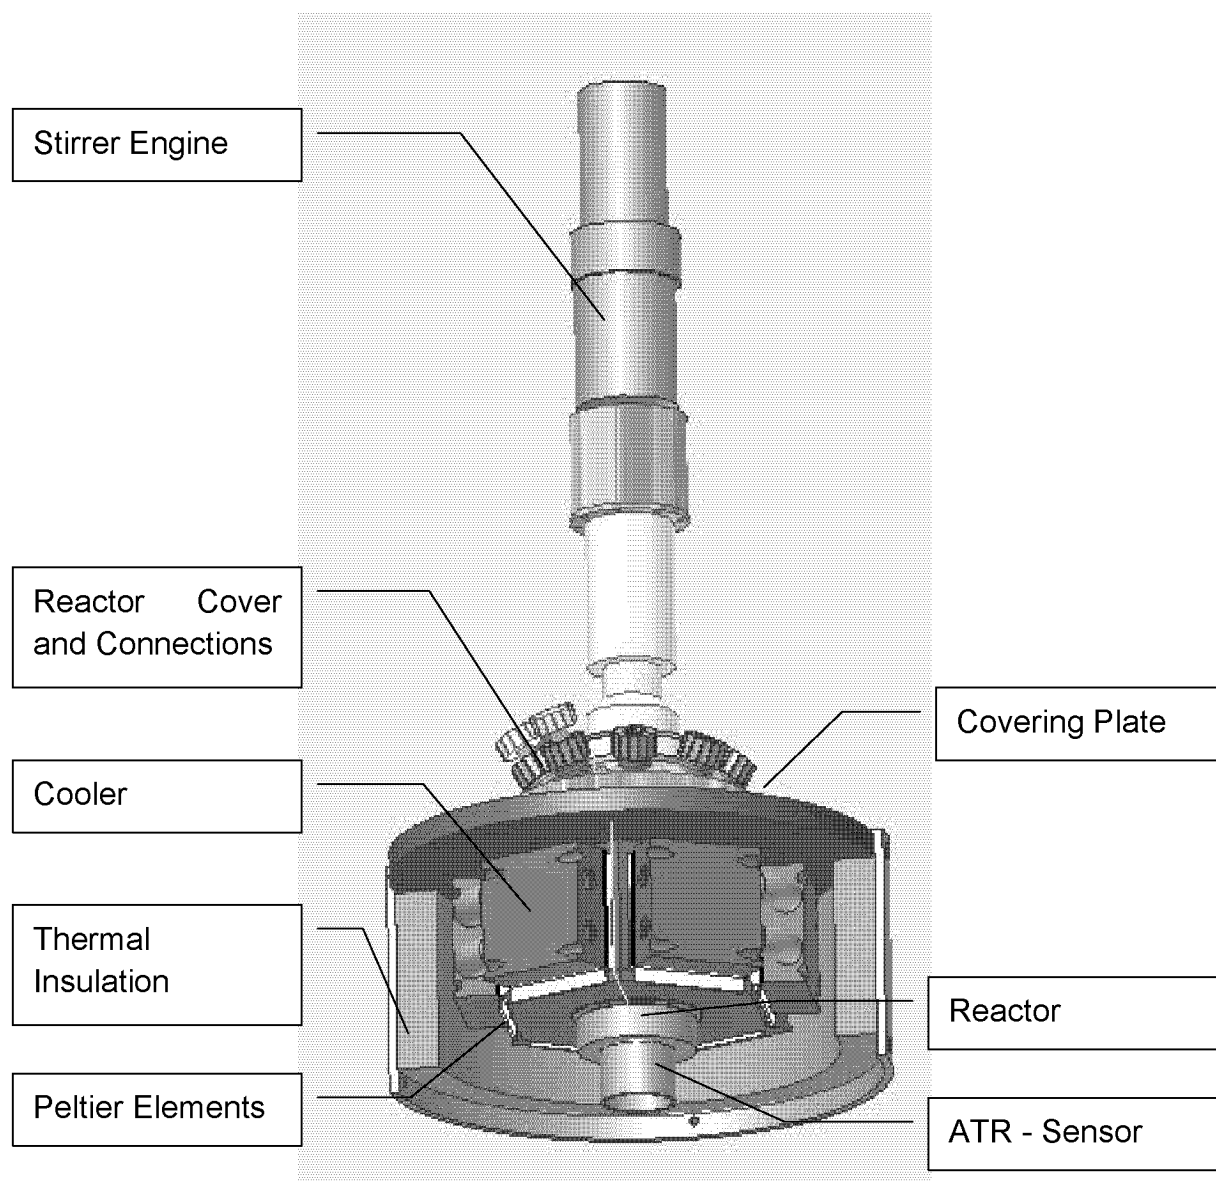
Final setup of the new reactor with the jacket insulation and the stirrer engine. (CAD – Drawings made by H. P. Schläpfer, Workshop ETH).
